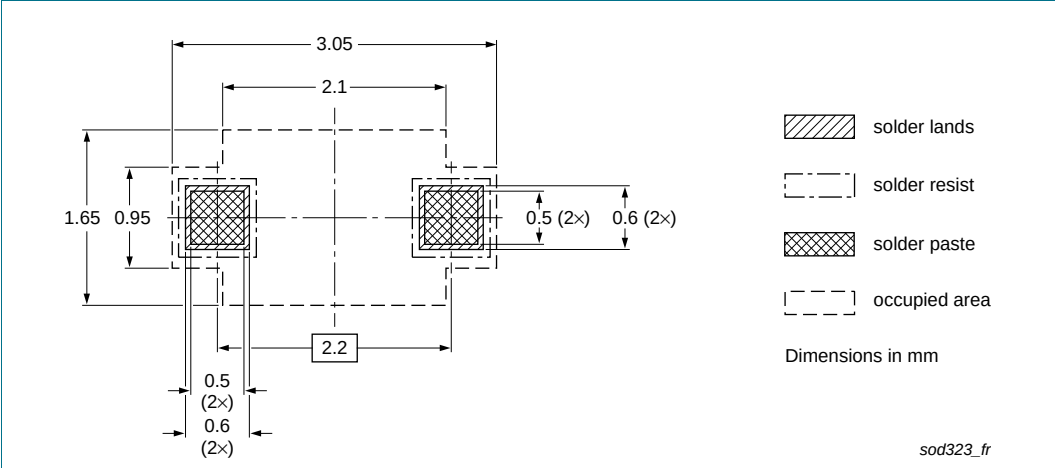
Reflow soldering footprint BAS316 (SOD323/SC-76)
